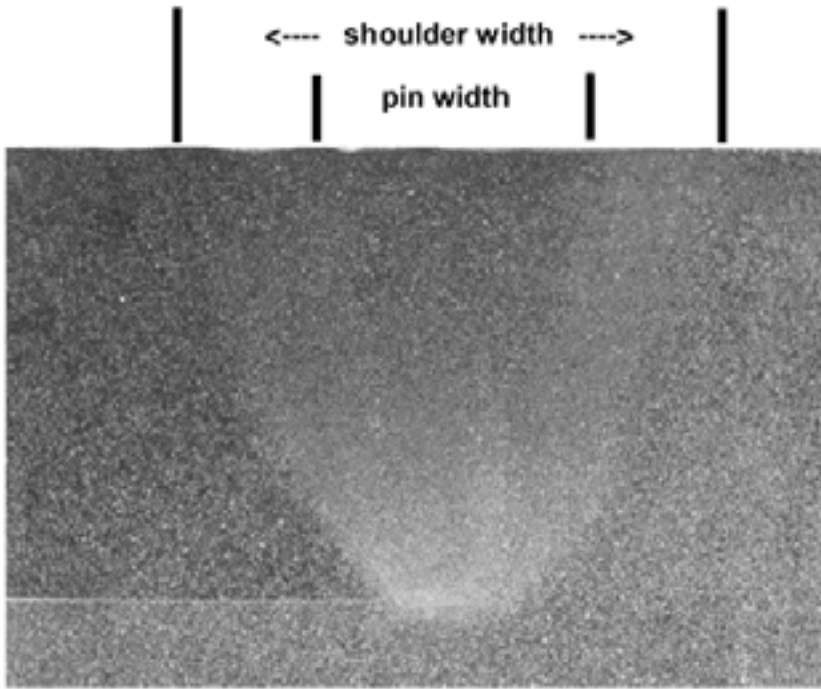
Cross section of a typical FSW weld. In the bottom left part is the gap between the welded pieces of copper still visible. Note the flaring of the weld zone at the top of the weld where the shoulder has pressed at the material. The pin width at the base is marked in the image. The pin then tapers down to 25% width at the tip.
